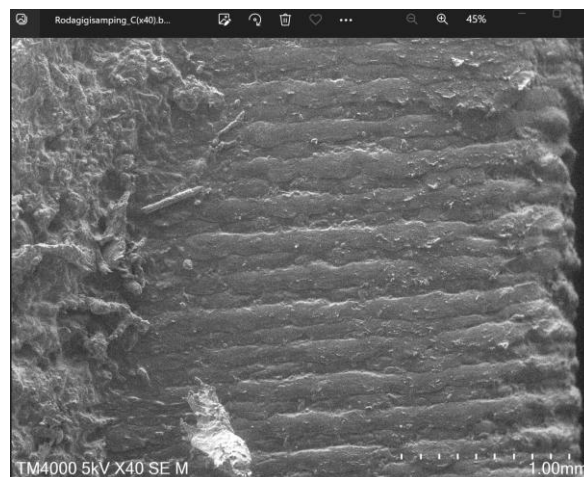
Photo of the tooth surface after the torsion test was carried out under conditions with grease lubricants on the Onyx material
